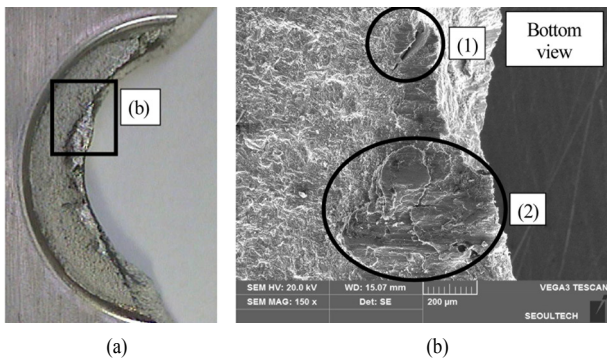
Bottom view of fracture surface about tensile-shear experiment specimen under low-loading condition ( $P_{max} = 2230.2 \text{ N}$ ).
